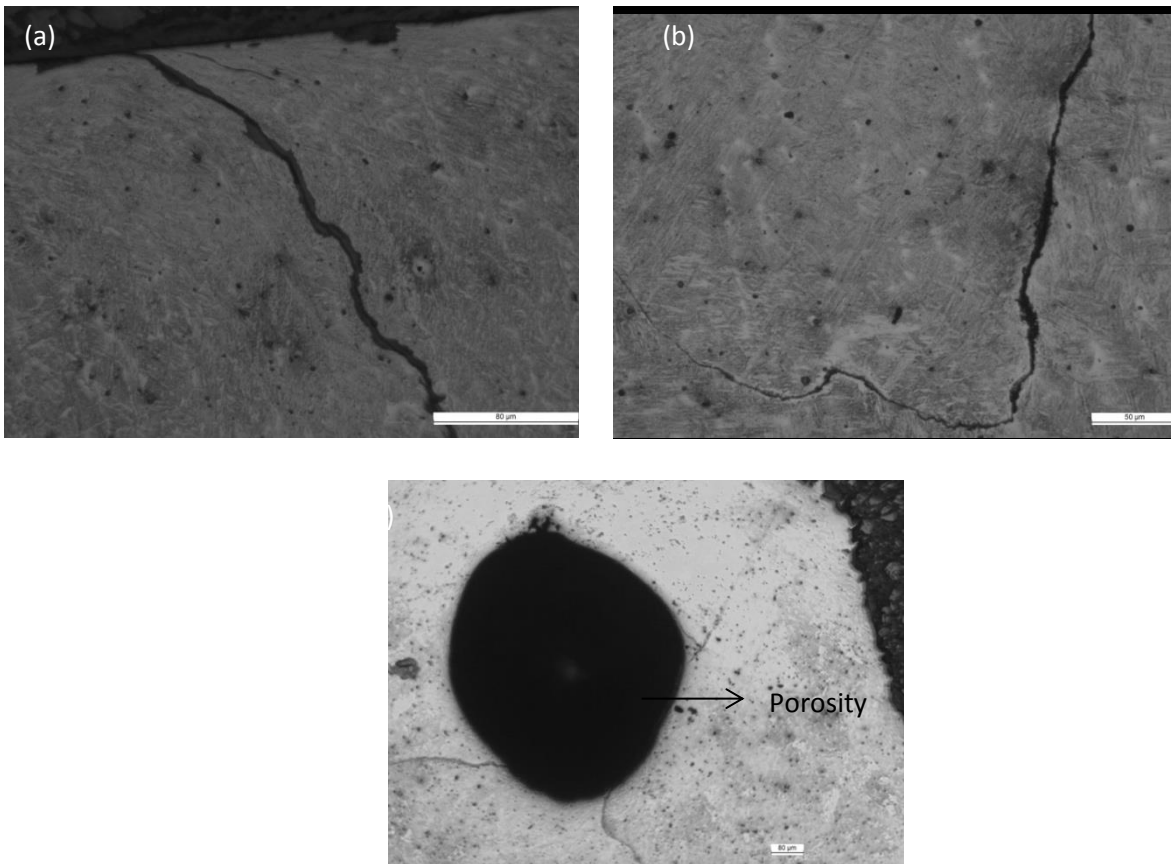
Defects present in the weld layer of the nose of the pearlitic crossing (a) and (b) multiple cracks present in the weld layer, and (c) porosity present in the weld layer.
